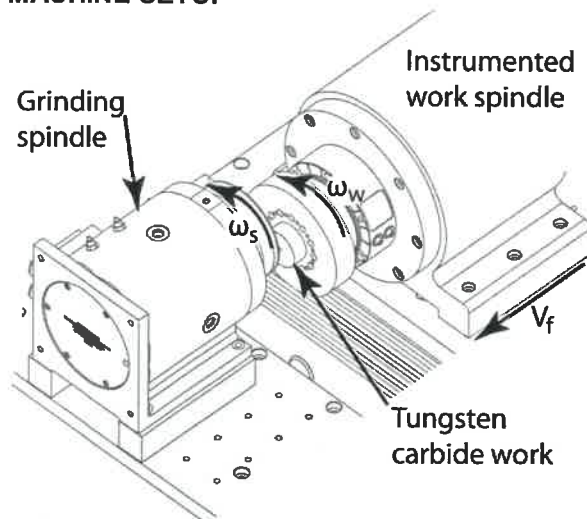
CNC grinding machine setup with displacement-sensing spindle with tungsten carbide work calibrated to output grinding force.
